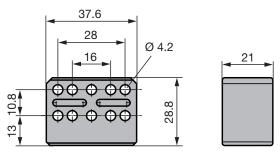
Installation dimensions of BTL6-A-3800-2 magnet
